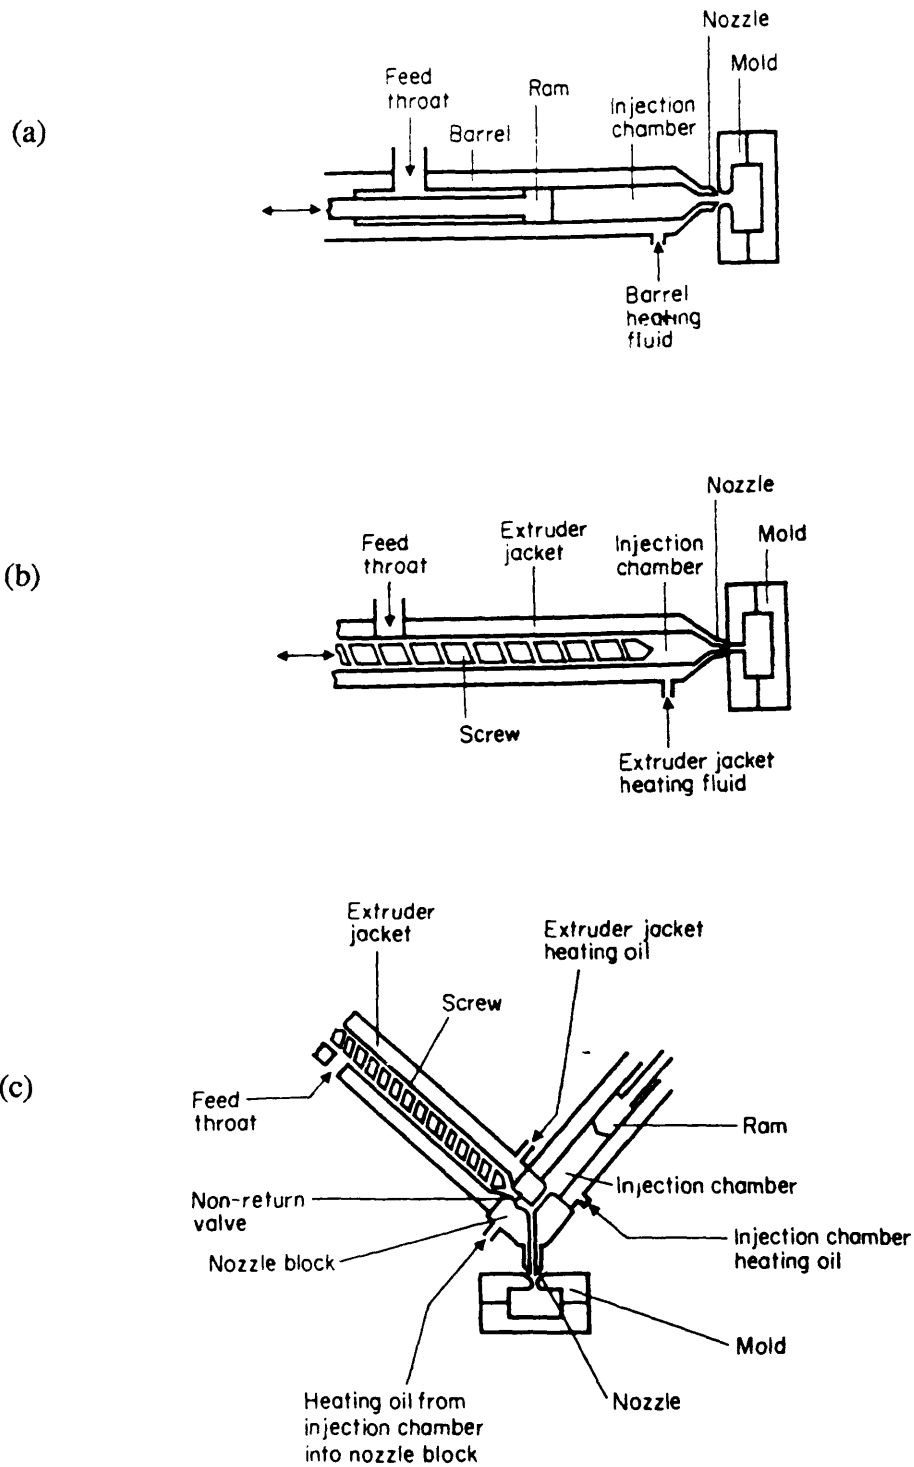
Schematic diagram of (a) ram injection extruder (b) in-line screw injection extruder and (c) out-line screw extruder.
